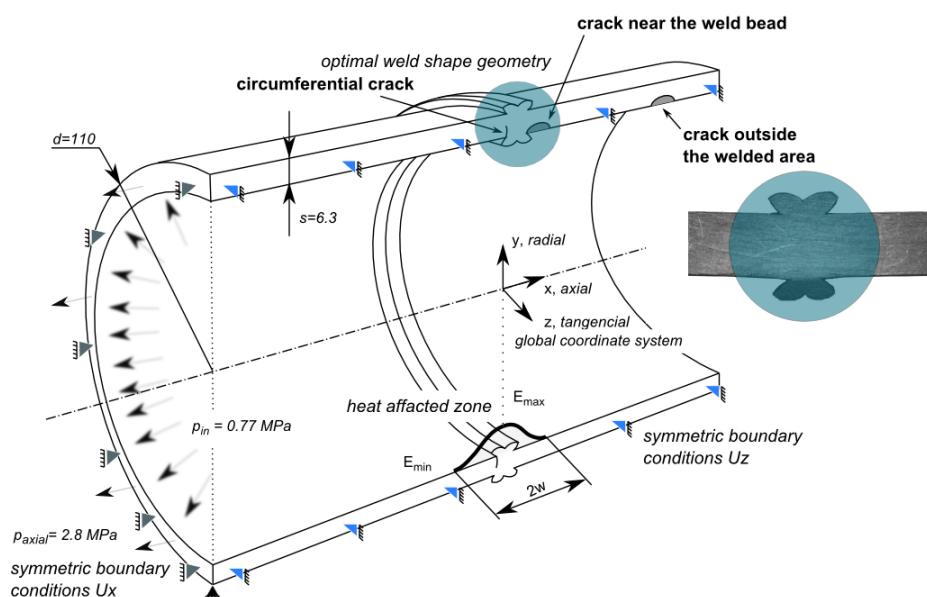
Welded pipes with the optimal weld bead geometry
